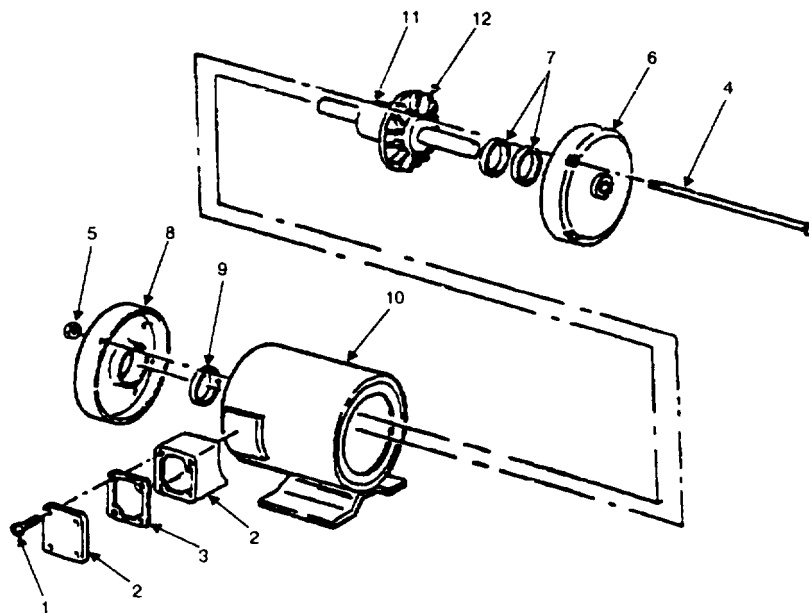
Air Compressor Motor - Disassembly and Assembly.
